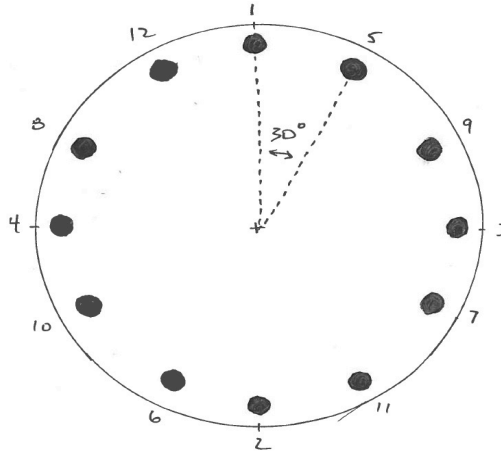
Standard star pattern and bolt numbering used for the assembly and torquing of the flange nuts for the device. Maximum torque required is 25 in. lbs. and is applied incrementally.
